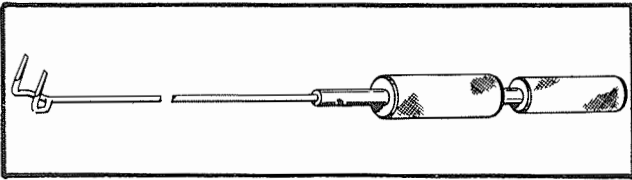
Cylinder Hold-Down Cap Screw Lock Plate Puller
